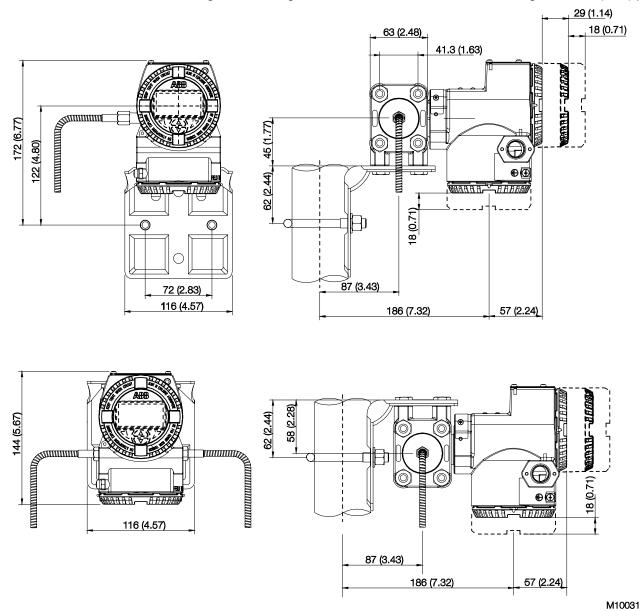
Dimensions - DIN housing with mounting bracket for vertical or horizontal mounting on 60 mm (2 in.) pipe
